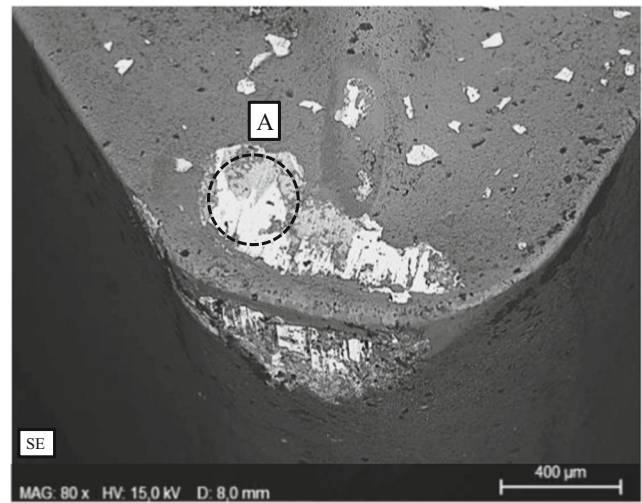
EDS of cutting tool used in dry turning with cutting speed of 600 m/min, obtained by SE mode
